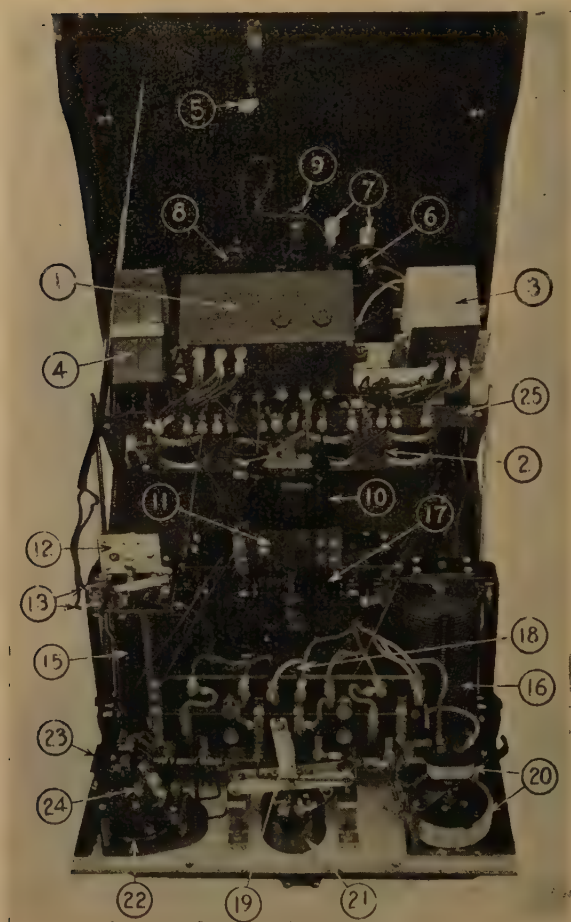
U. S. Coast Guard radio direction finder, Type-A, Model CGR-17 C, receiver assembly.
